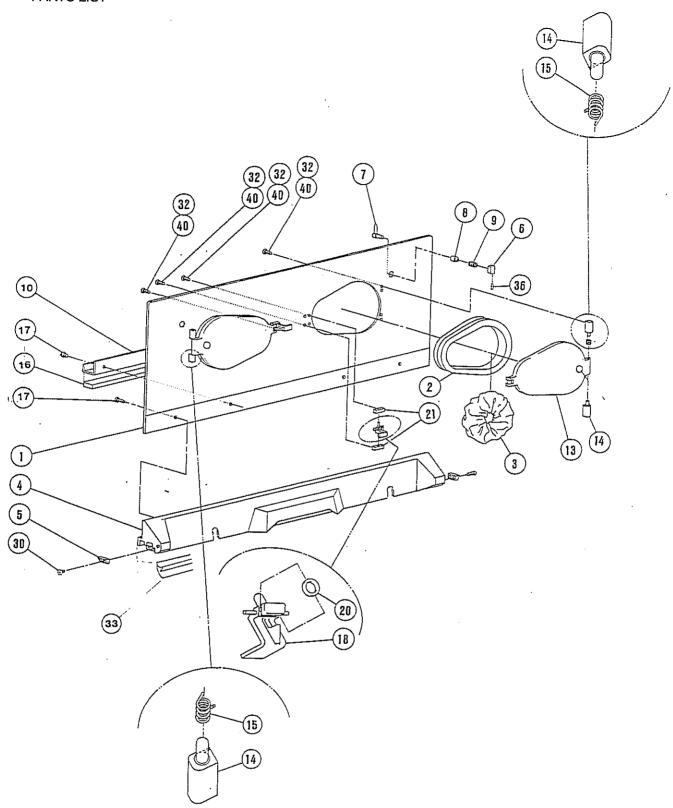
PARTS LOCATION DIAGRAM, ACCESS PANEL ASSEMBLY, GROUP 2 UNITS
